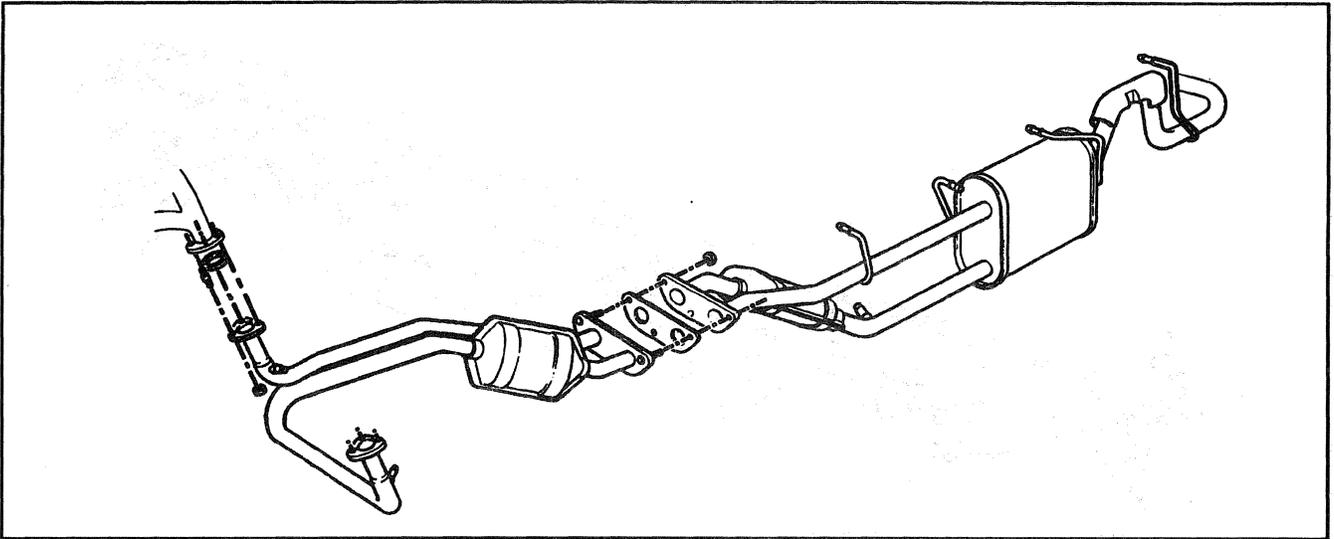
Exhaust System - C 314 Cab Chassis w/7.4L Engine over 15,000 GVW
